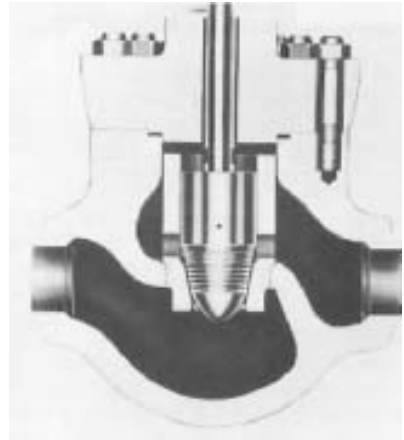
Control valve with flow through labyrinthine orifices in built-up cage (Control Components)
